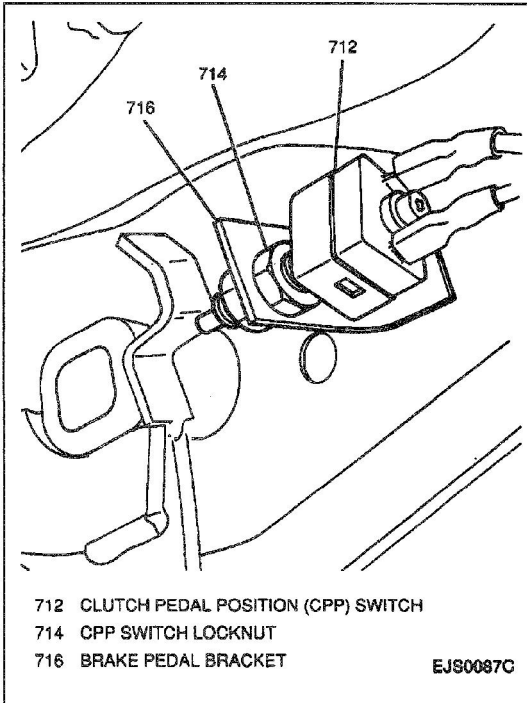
Clutch Pedal Position (CPP) Interrupt Switch at Brake Pedal Bracket
